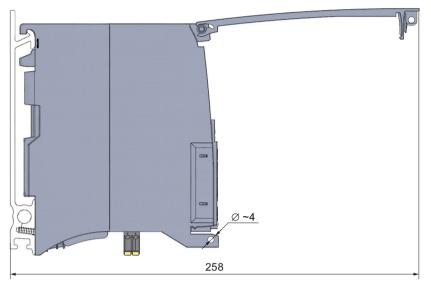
Dimensional drawing of the CPU 1511T-1 PN, side view with front panel open
